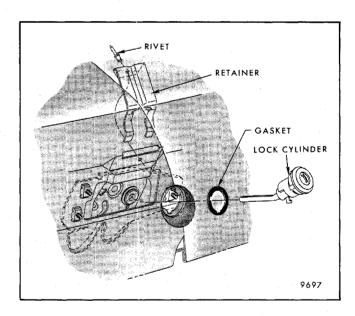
Typical Top Loading Lock Cylinder Retainer
